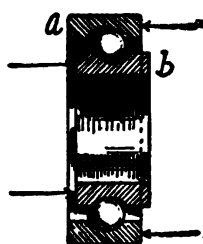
Annular Ball Bearing Subjected to Thrust.
